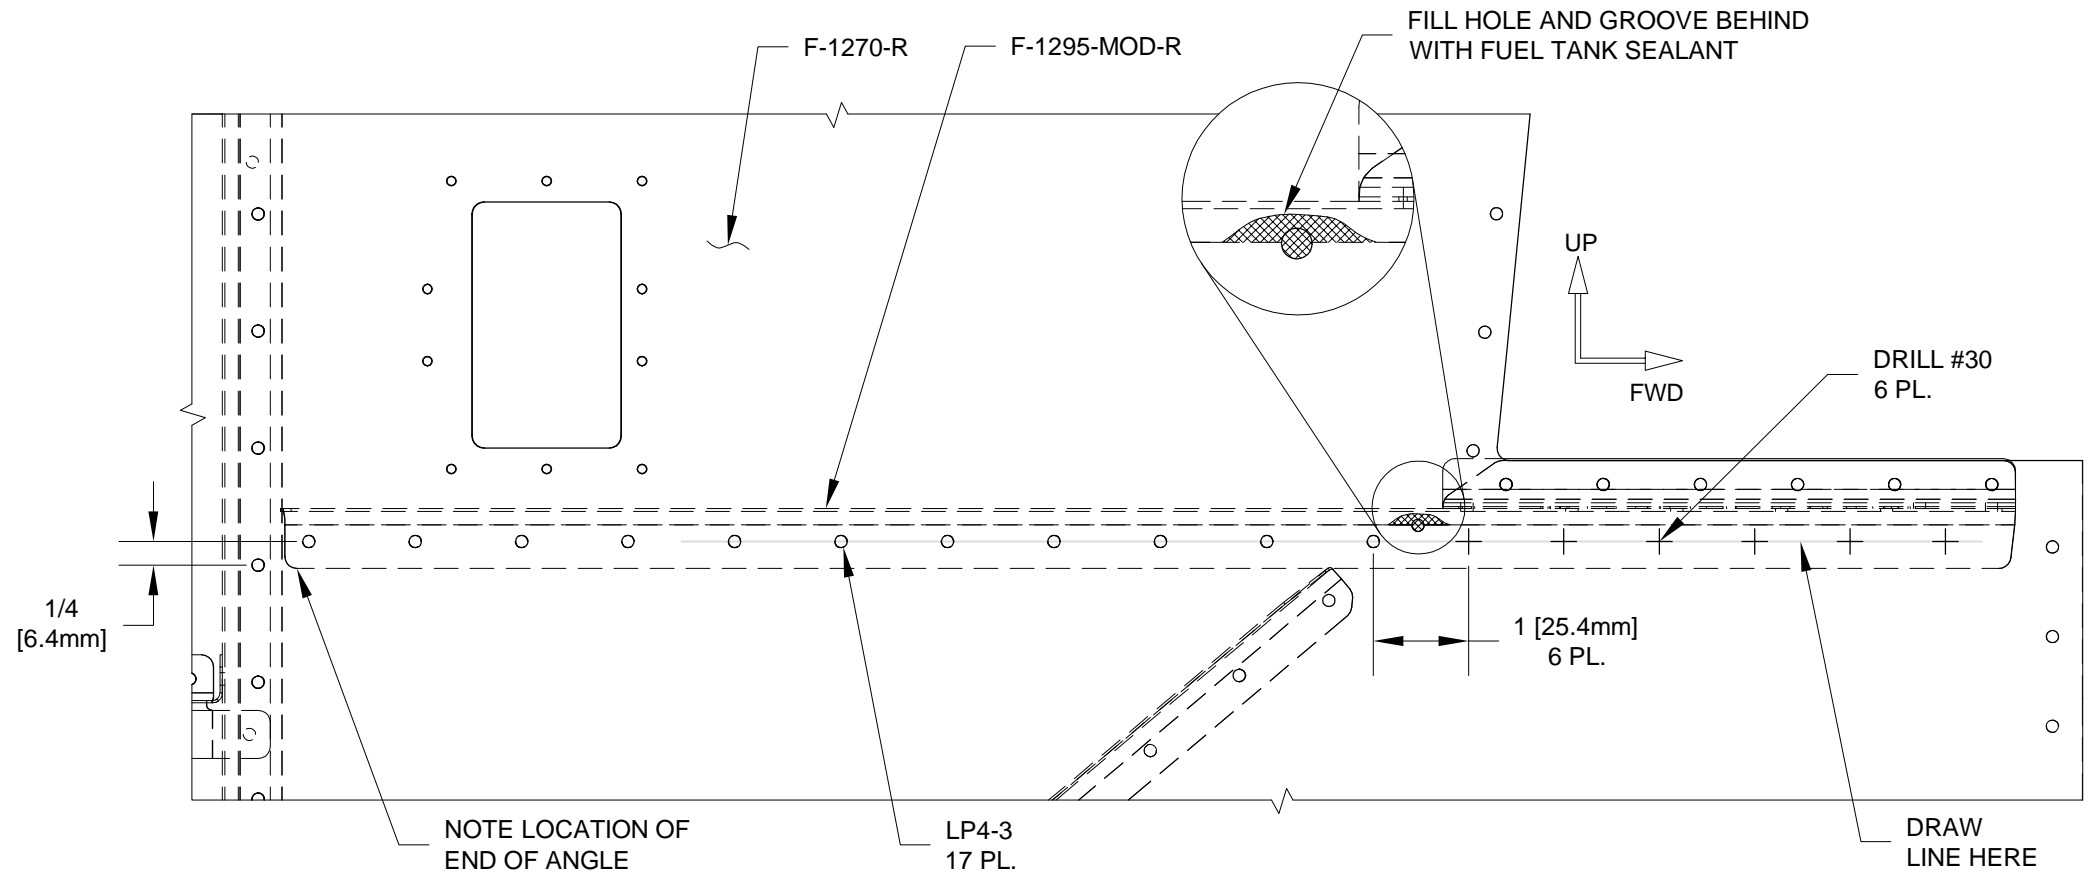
DRILL SIDE SKIN FOR FWD END OF SKIN STIFFENER
